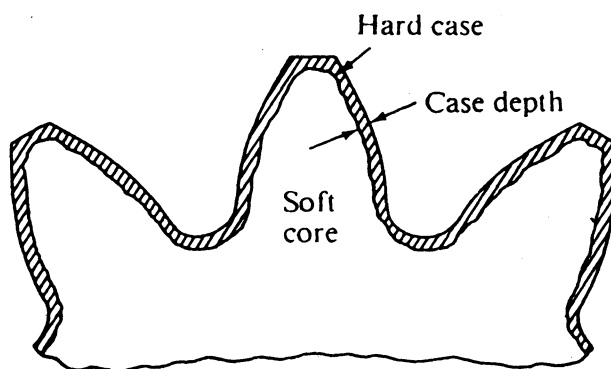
Typical Case Hardened Gear-Tooth Section
